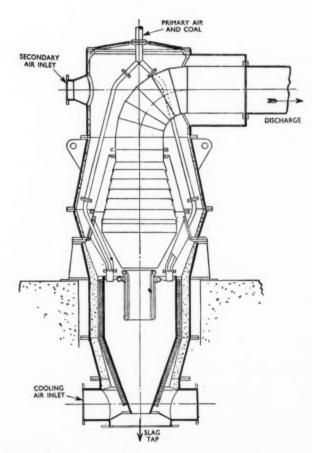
Cyclone slagging combustion chamber for 2000-kw English Electric coal-burning gas-turbine set
